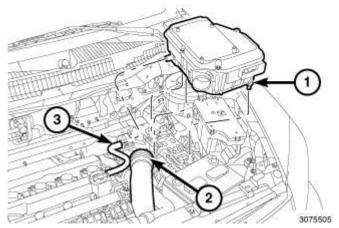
Air Cleaner Body, Air Inlet Tube & Make-Up Air Hose Courtesy of CHRYSLER GROUP, LLC
